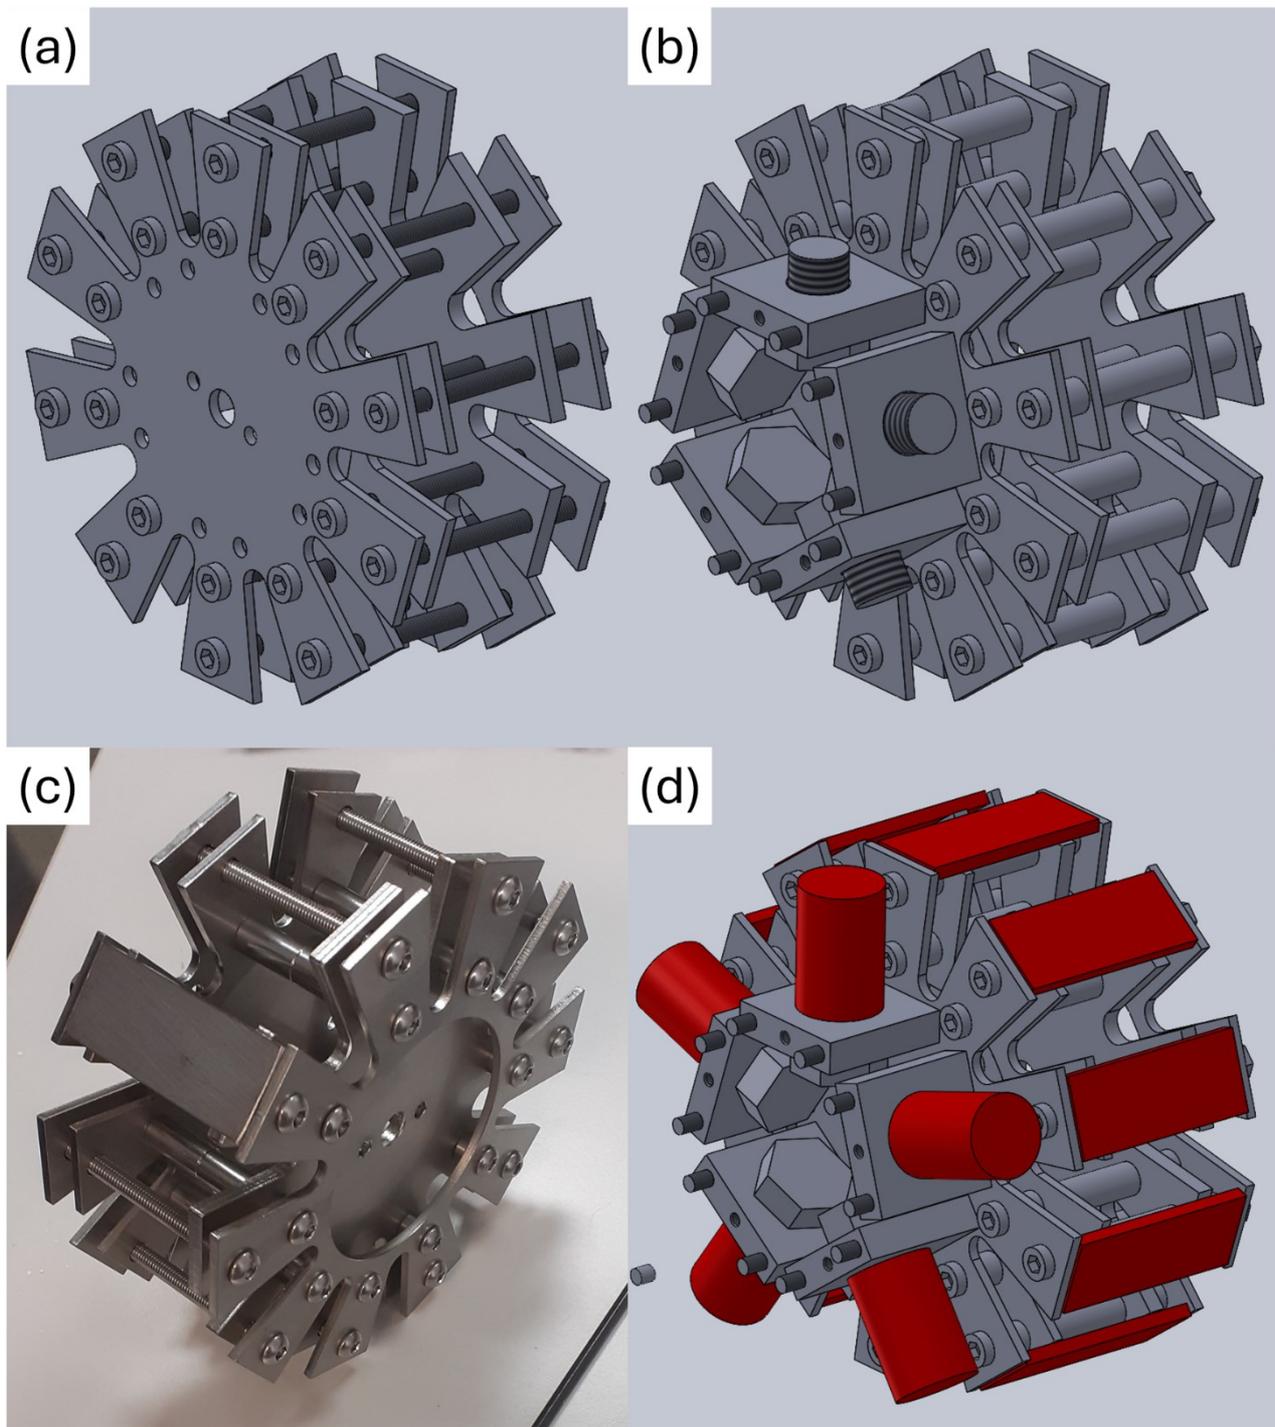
Sample holder design: (a) setup for plates only, (b) setup for plates and cylinders, (c) photograph of the sample holder assembled in plates-only configuration, (d) schematic of the sample holder in full configuration with projected position of plates and cylinders (in red)
